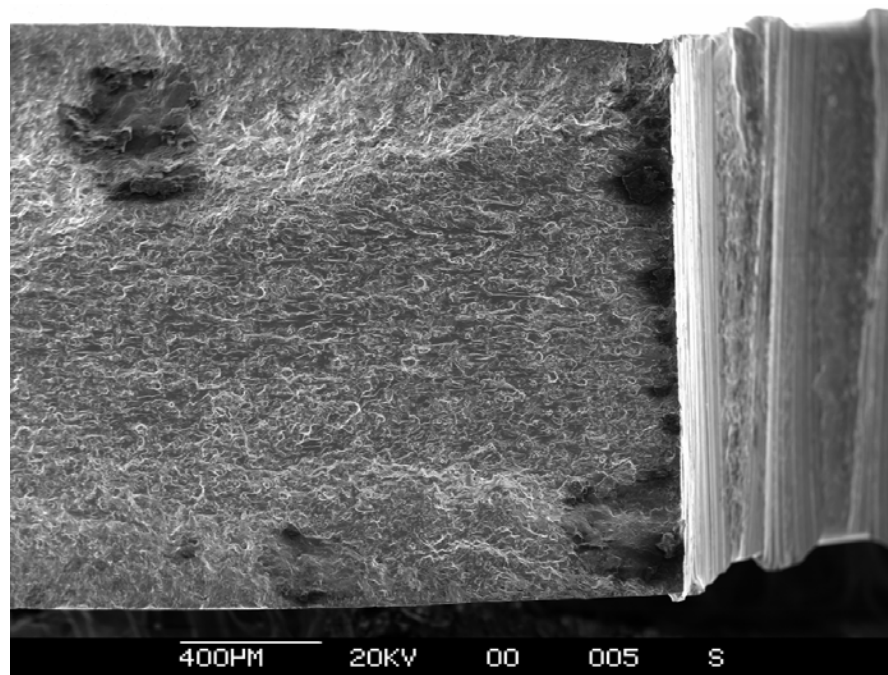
Fracture Surface of specimen 2 showing crack initiation area
